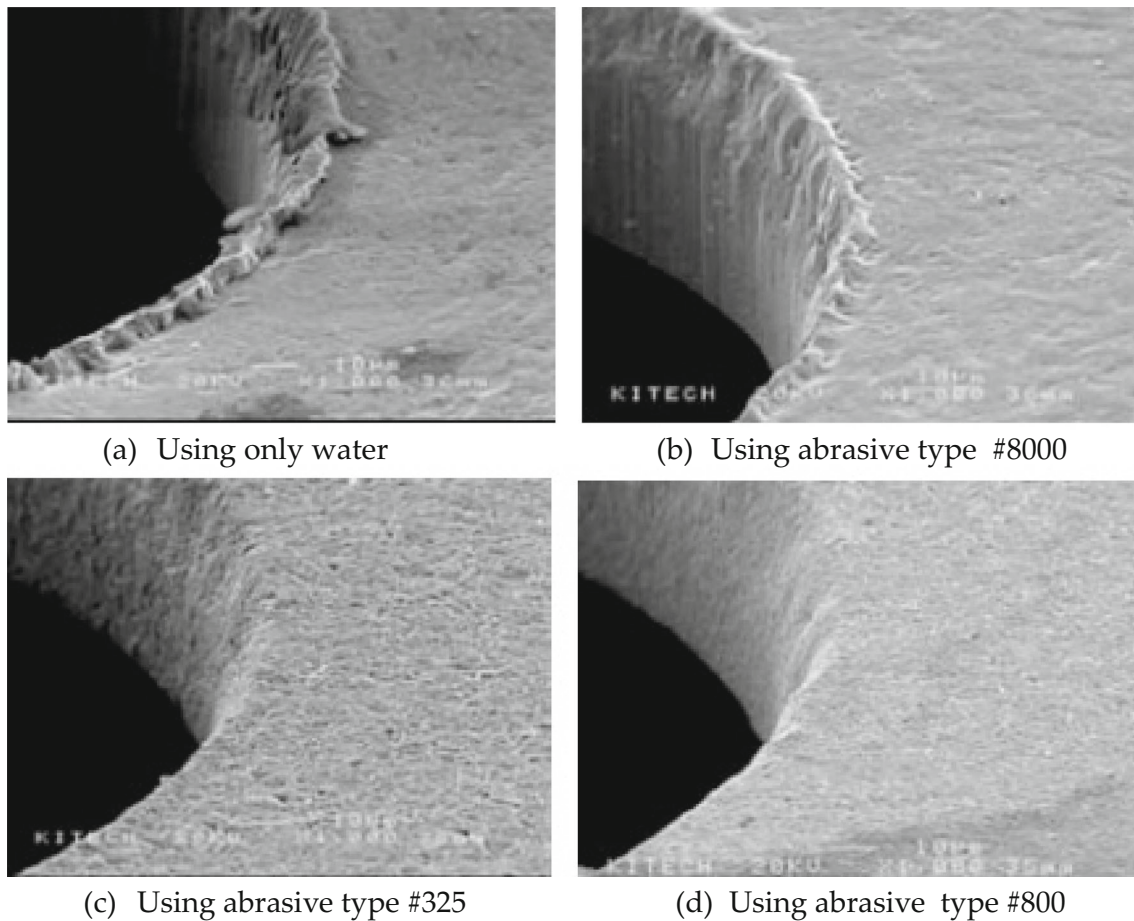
Hole shape after ultrasonic deburring without abrasive and with abrasive (Adapted from [128])
